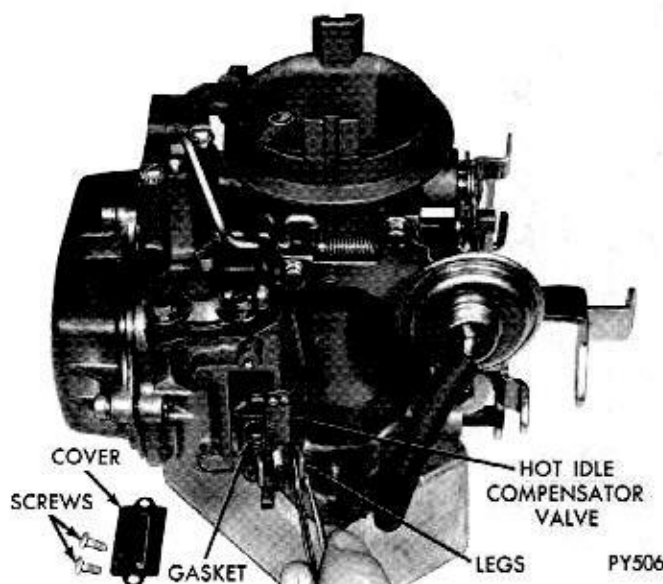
Removing or Installing Hot Idle Compensator Valve (H.I.C.)
